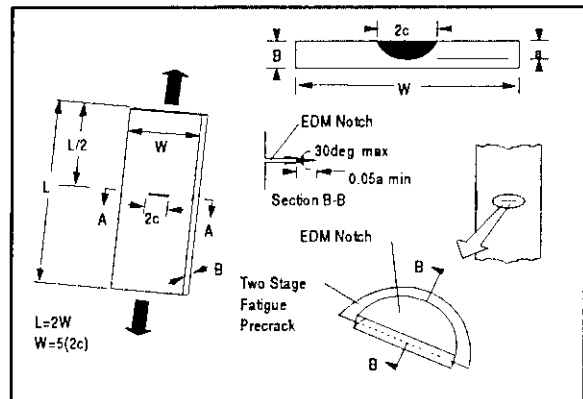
ASTM E740 Surface Crack Tension Test Specimen
